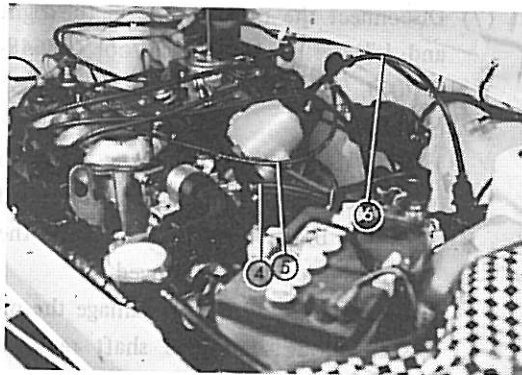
Removing Parts from Engine Compartment (Part 2)
